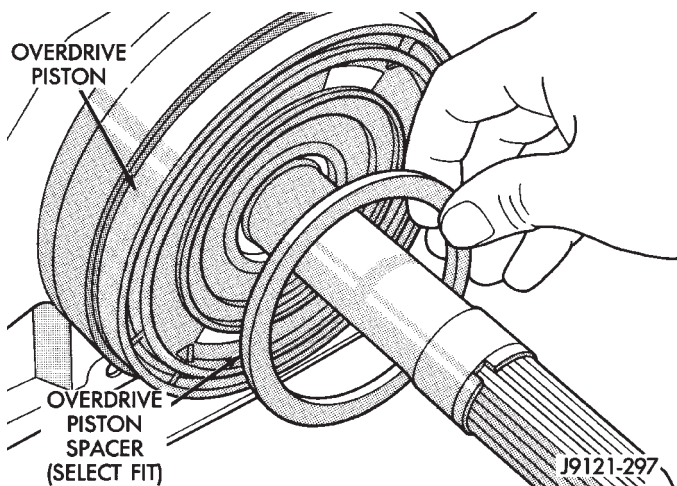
Overdrive Piston Thrust Plate Removal/Installation
